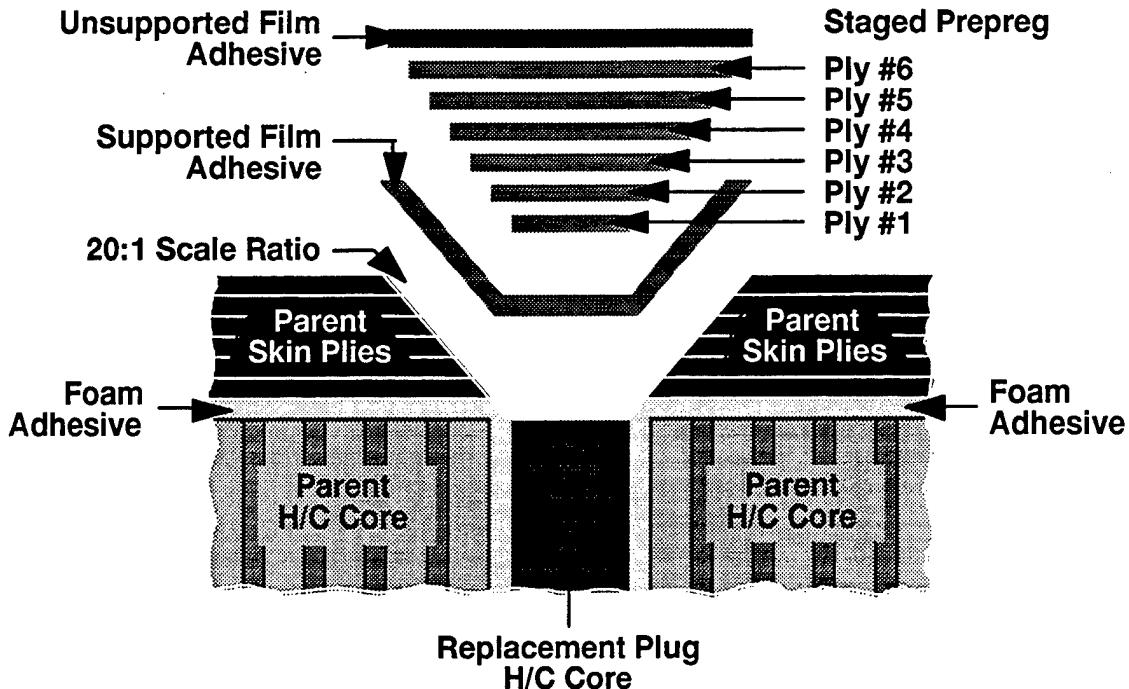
One-Sided Skin and Honeycomb Core Repair [39].
